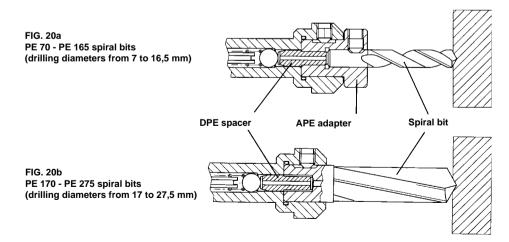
COOLING DRILLING WITH SPIRAL BIT
